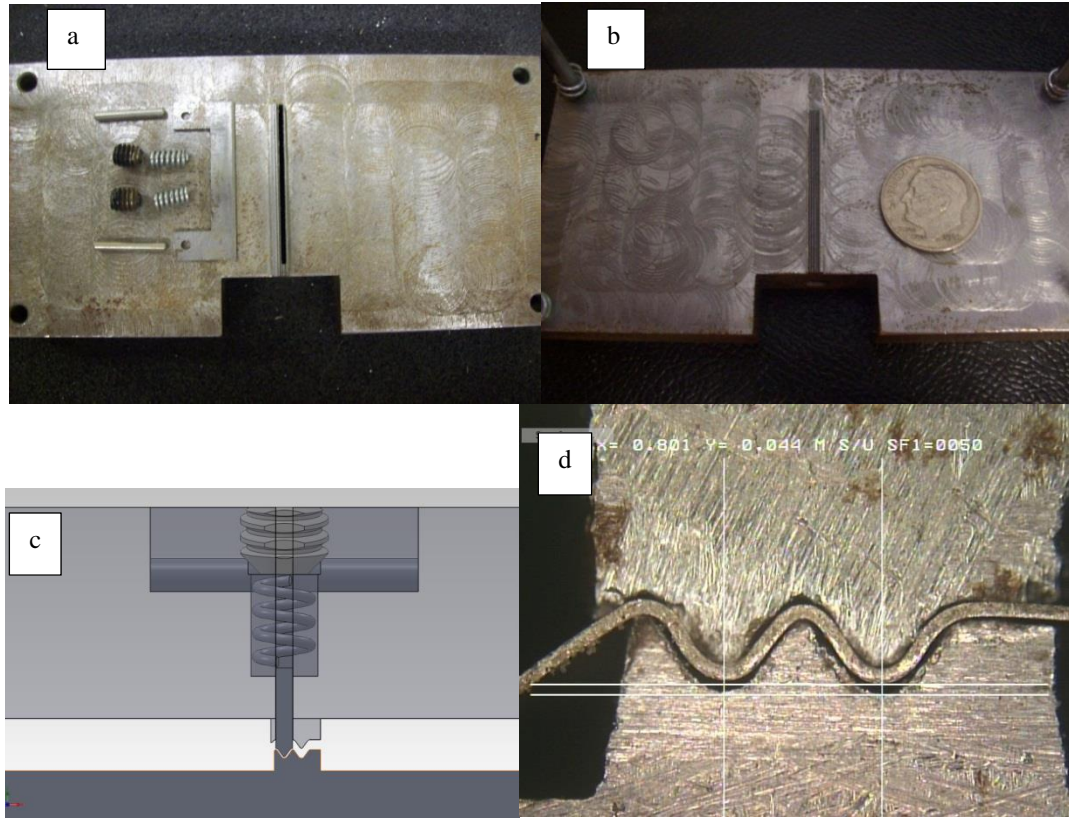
The corrugating punch and die built for MPTN forming. (a) Disassembled punch showing the spring-backed workholding insert assembly. (b) MPTN Forming die. The forming area is a small 5x26[mm] section in the center of the pieces. (c) a solid model showing the punch and die geometry. (d) a micrograph of the punch and die making contact with the material during forming.
